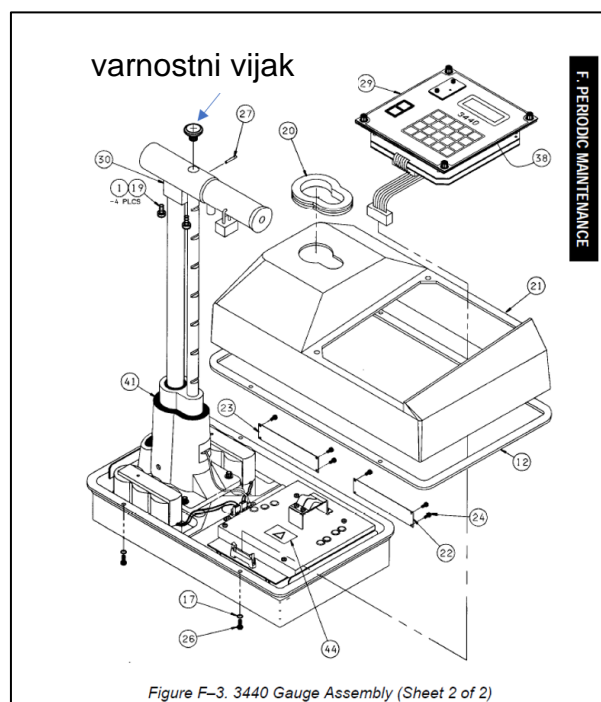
3440 Gauge Assembly (Sheet 2 of 2)
